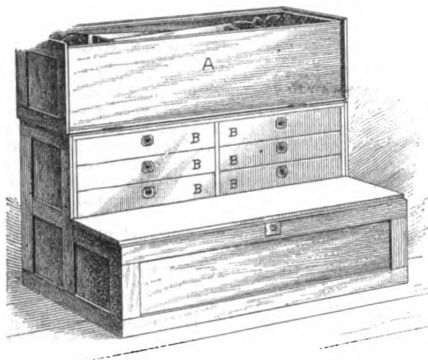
Showing Chest Open, with Cover of Saw Rack Removed.
